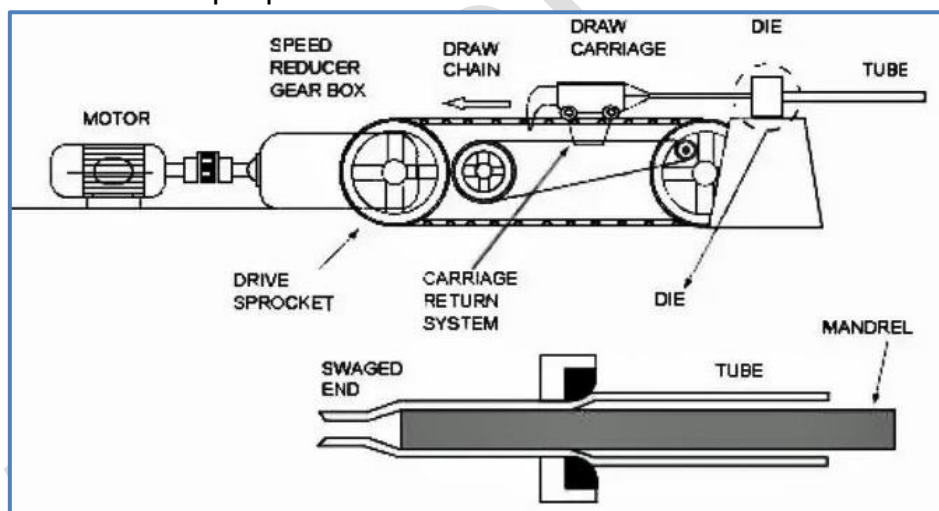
Schematic of a Hydraulic Cold Wire-Drawing Bench [4]
